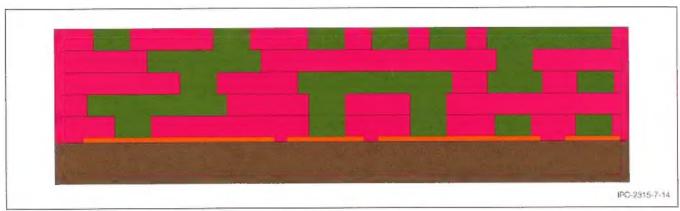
Design Example for HDI Board Utilizing Conductive Ink Build Up
